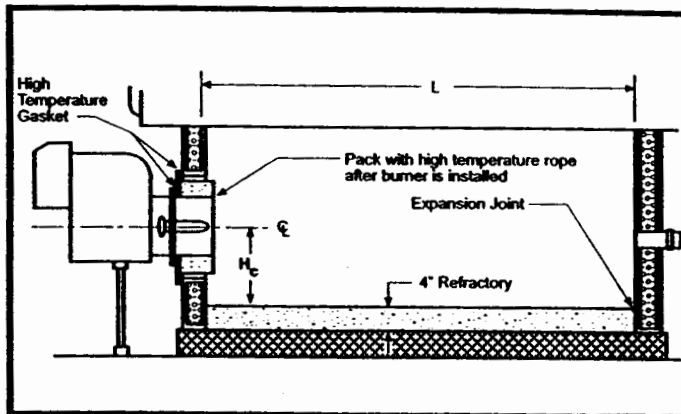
Type "R" Burner Installation Firing Forced Draft Boiler
